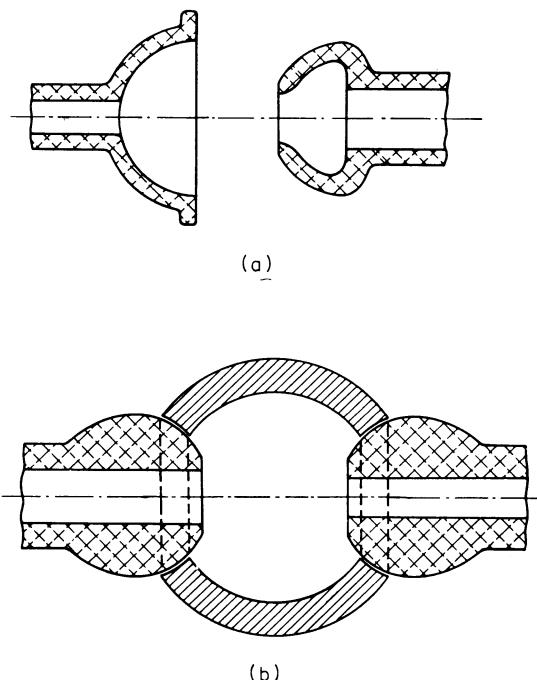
Spherical ground joints: (a) ball and socket; (b) metal socket connecting two ball joints
